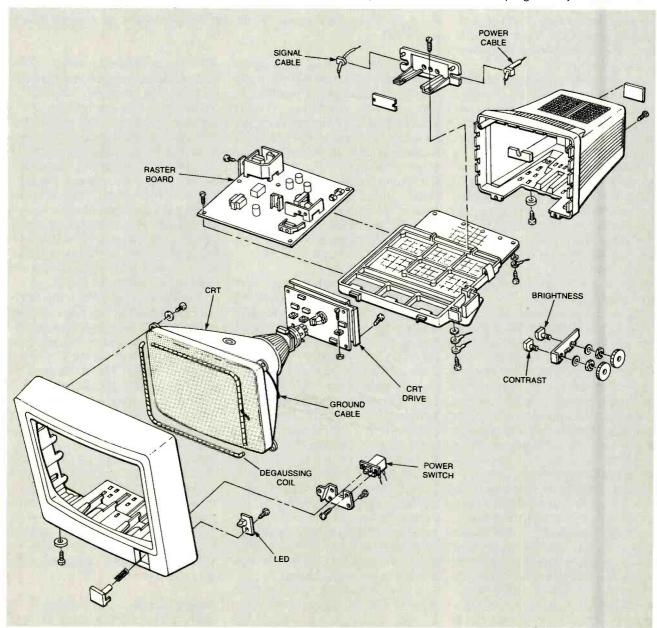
Inside a typical monitor. This exploded view shows the CRT, the main or raster board, the CRT-drive board, and more. (Illustration Courtesy of Tandy Corporation).
